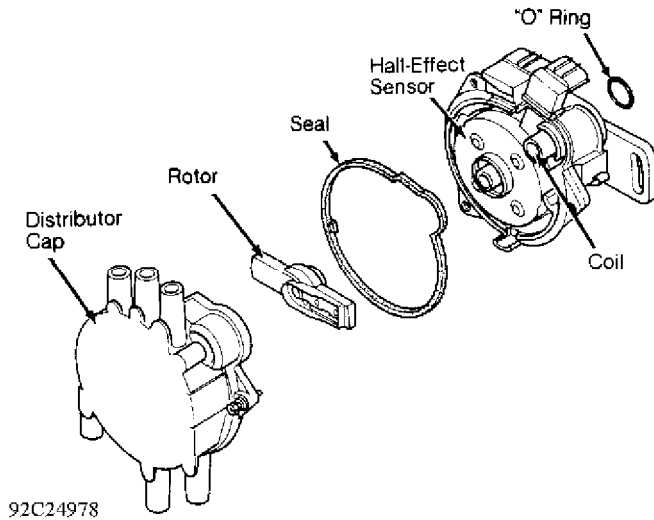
Exploded View Of Distributor (MX-3 1.8L, MX-6 2.5L & 626 2.5L)
